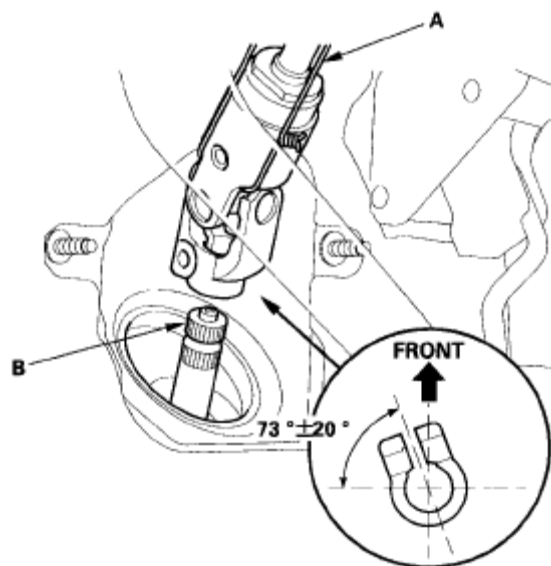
Identifying Steering Joint Onto Pinion Shaft
